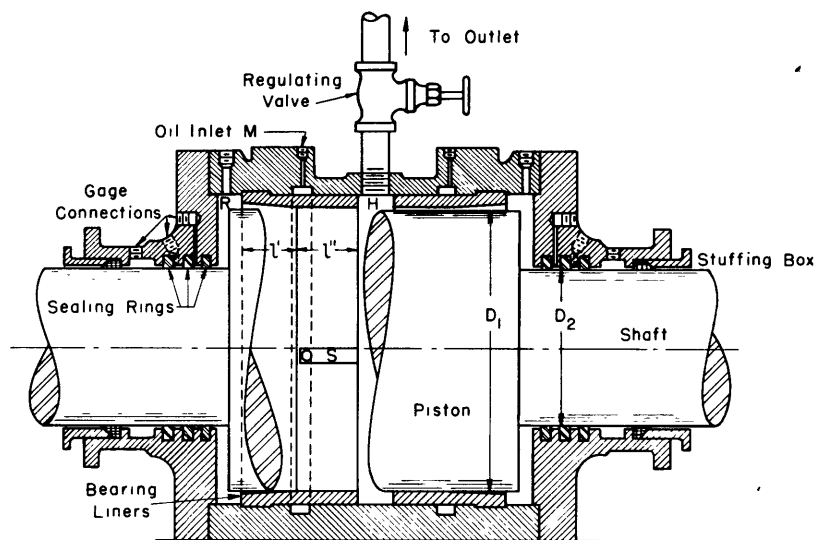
Longitudinal Section Through 0.3-Scale Model Restraining Block
